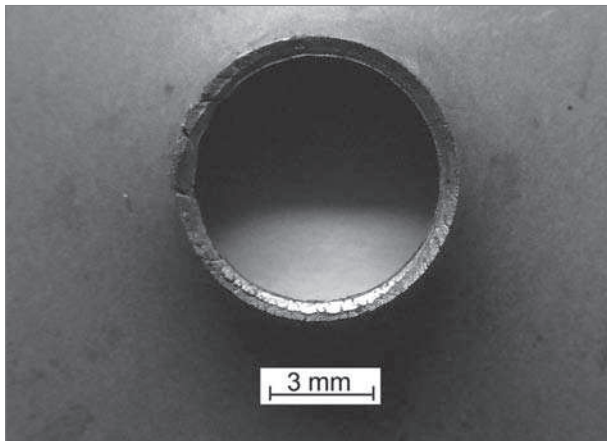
Cracks over the entire width of test piece's flange. Hole diameter enlarged by 44%
